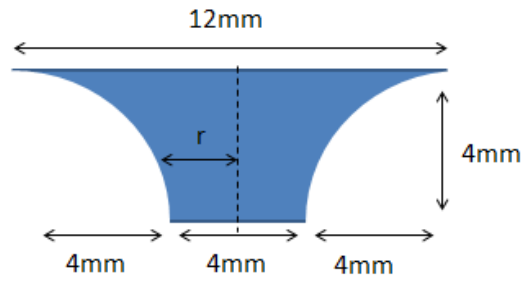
Vertical cross-section of "trumpet"-shaped section of closed end forming section of die
